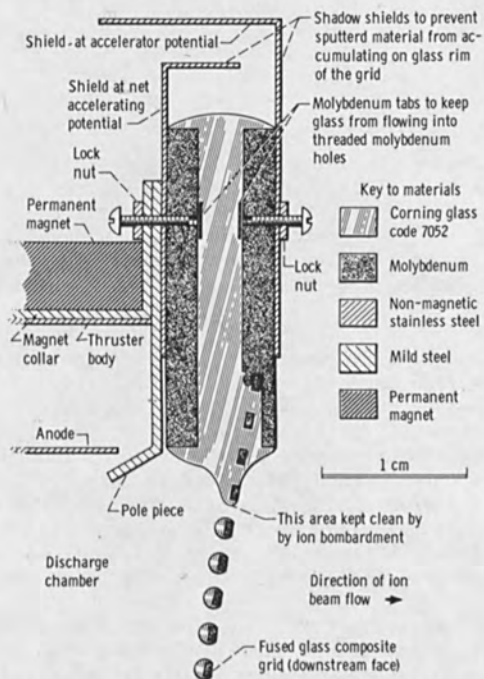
Section view of the retaining assembly of the dished grid showing thruster mounting detail.
